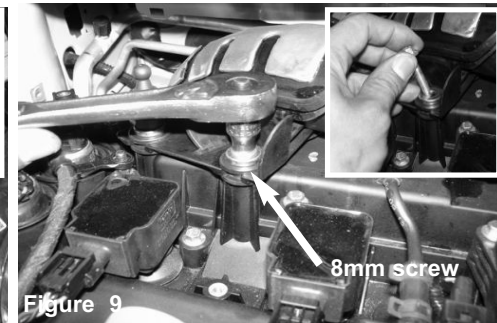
Loosen the 8mm screw holding in the plastic turbo elbow. Remove the screw.
